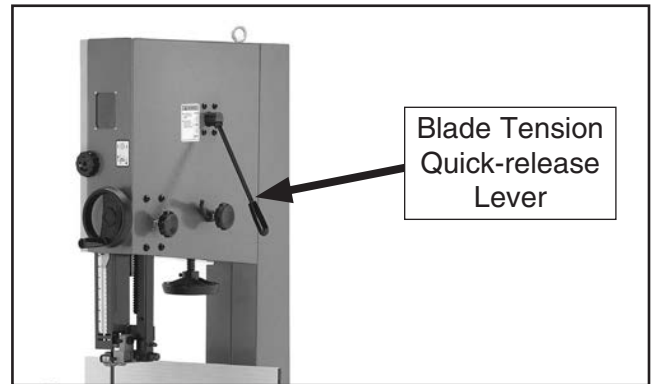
Blade tension quick-release lever (G0513X2 shown).
